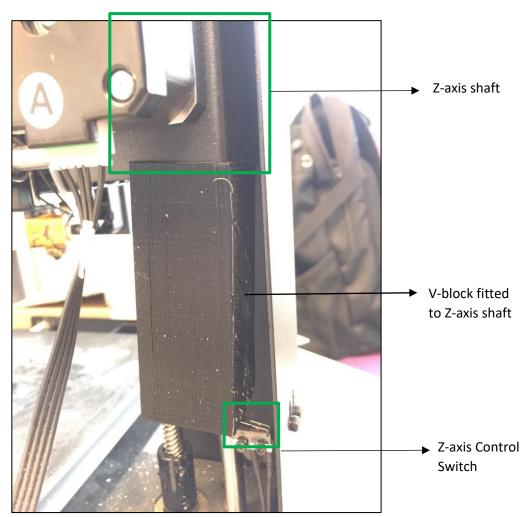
V-block offsetting the Z-axis by hitting the Z-axis switch beforehand
